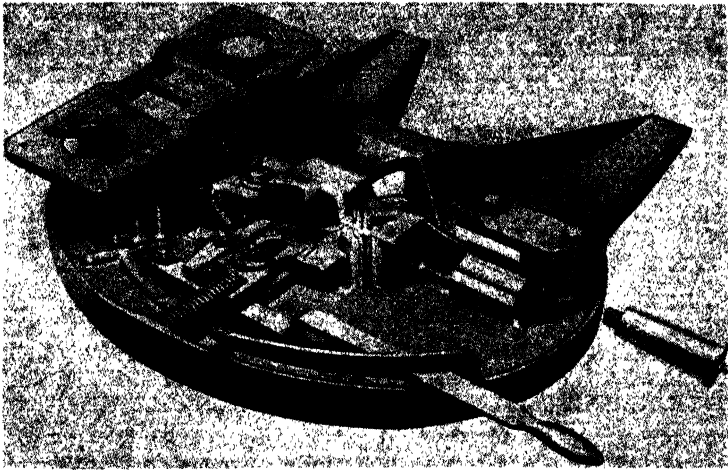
CUTAWAY BOTTOM VIEW OF DAYTON FIFTH WHEEL.
